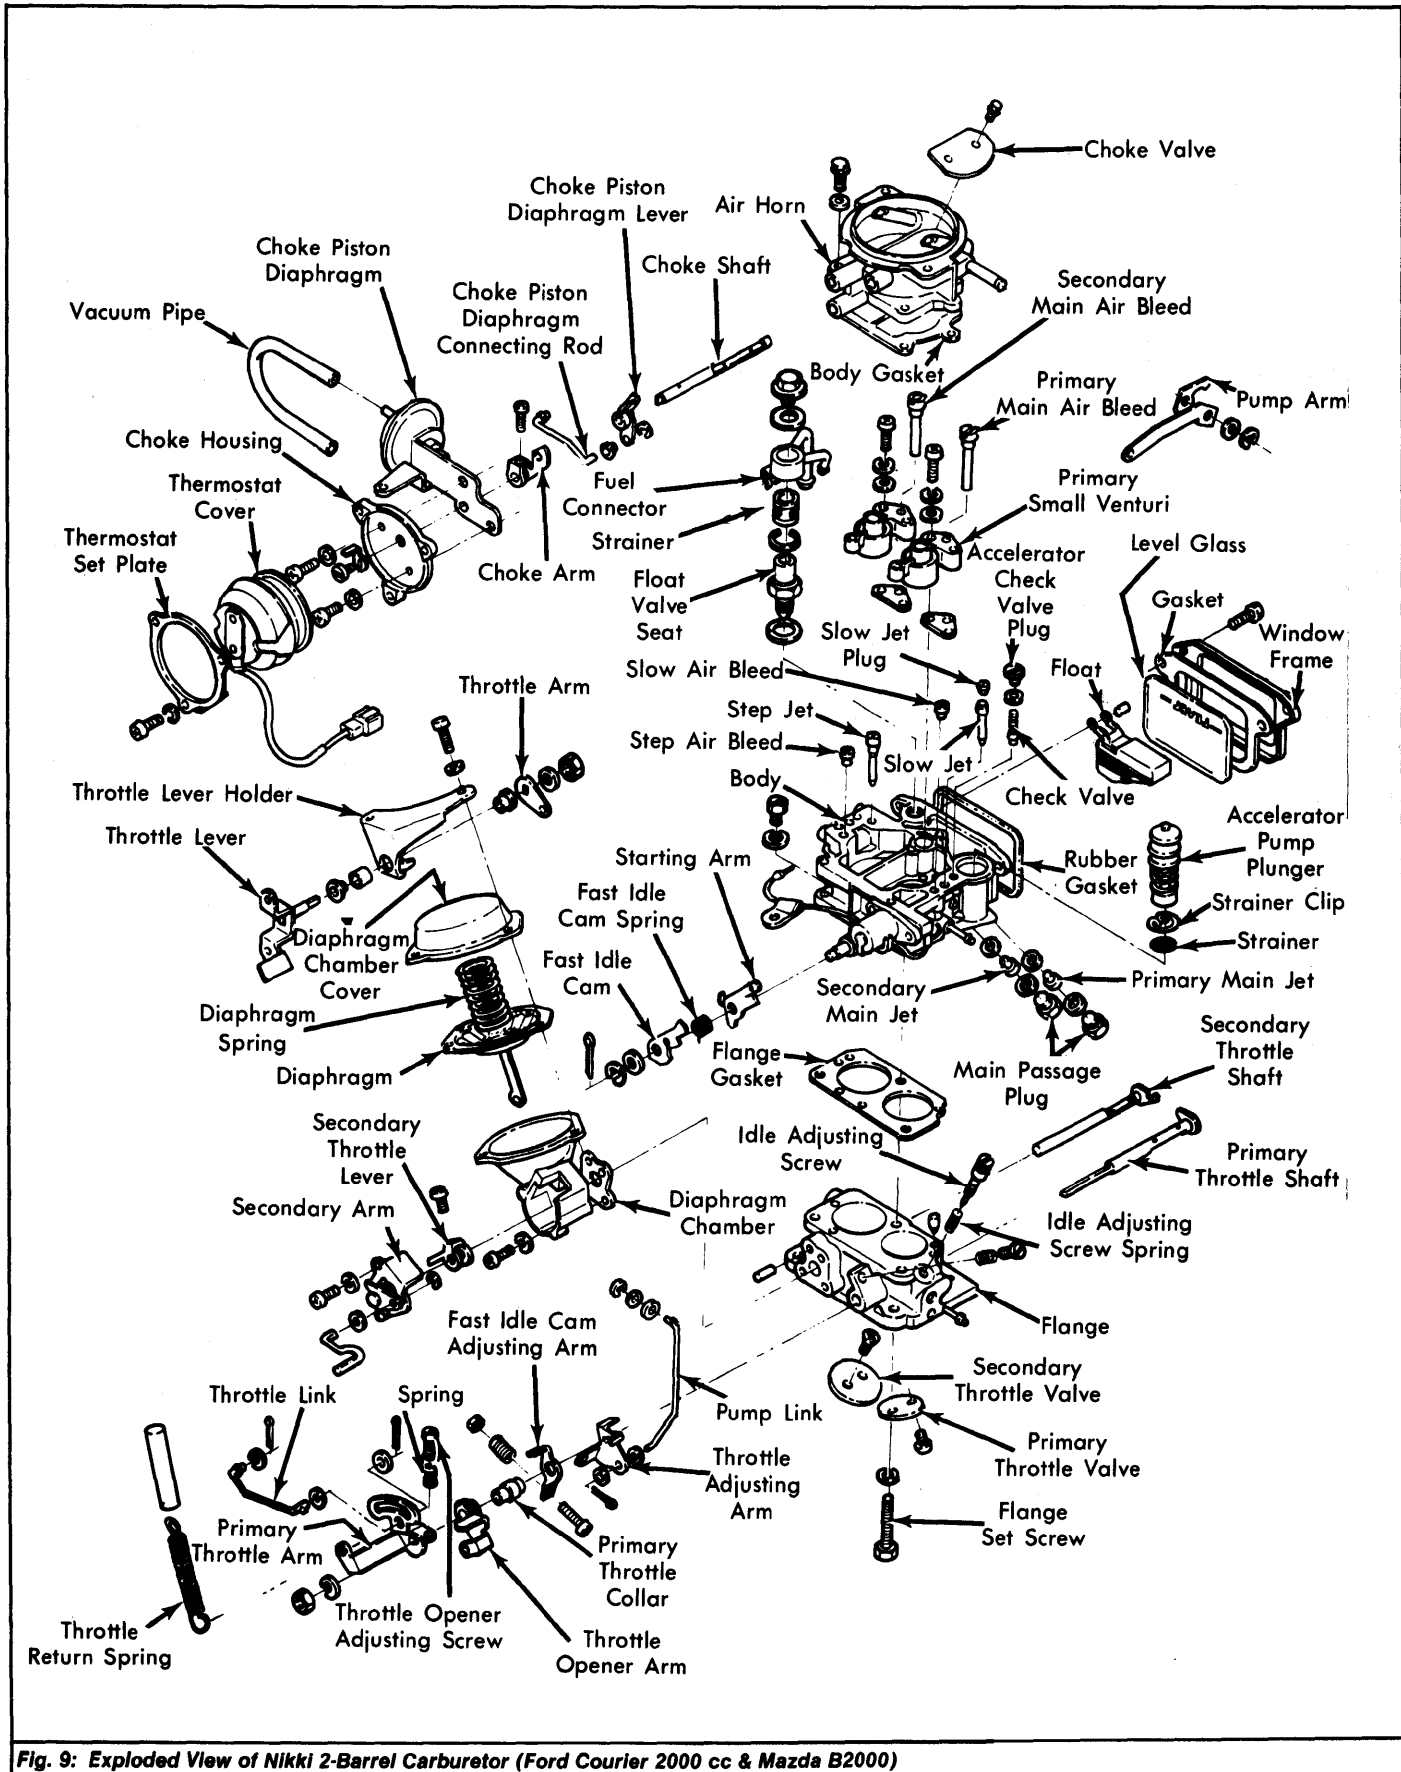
Exploded View of Nikki 2-Barrel Carburetor (Ford Courier 2000 cc & Mazda B2000)
